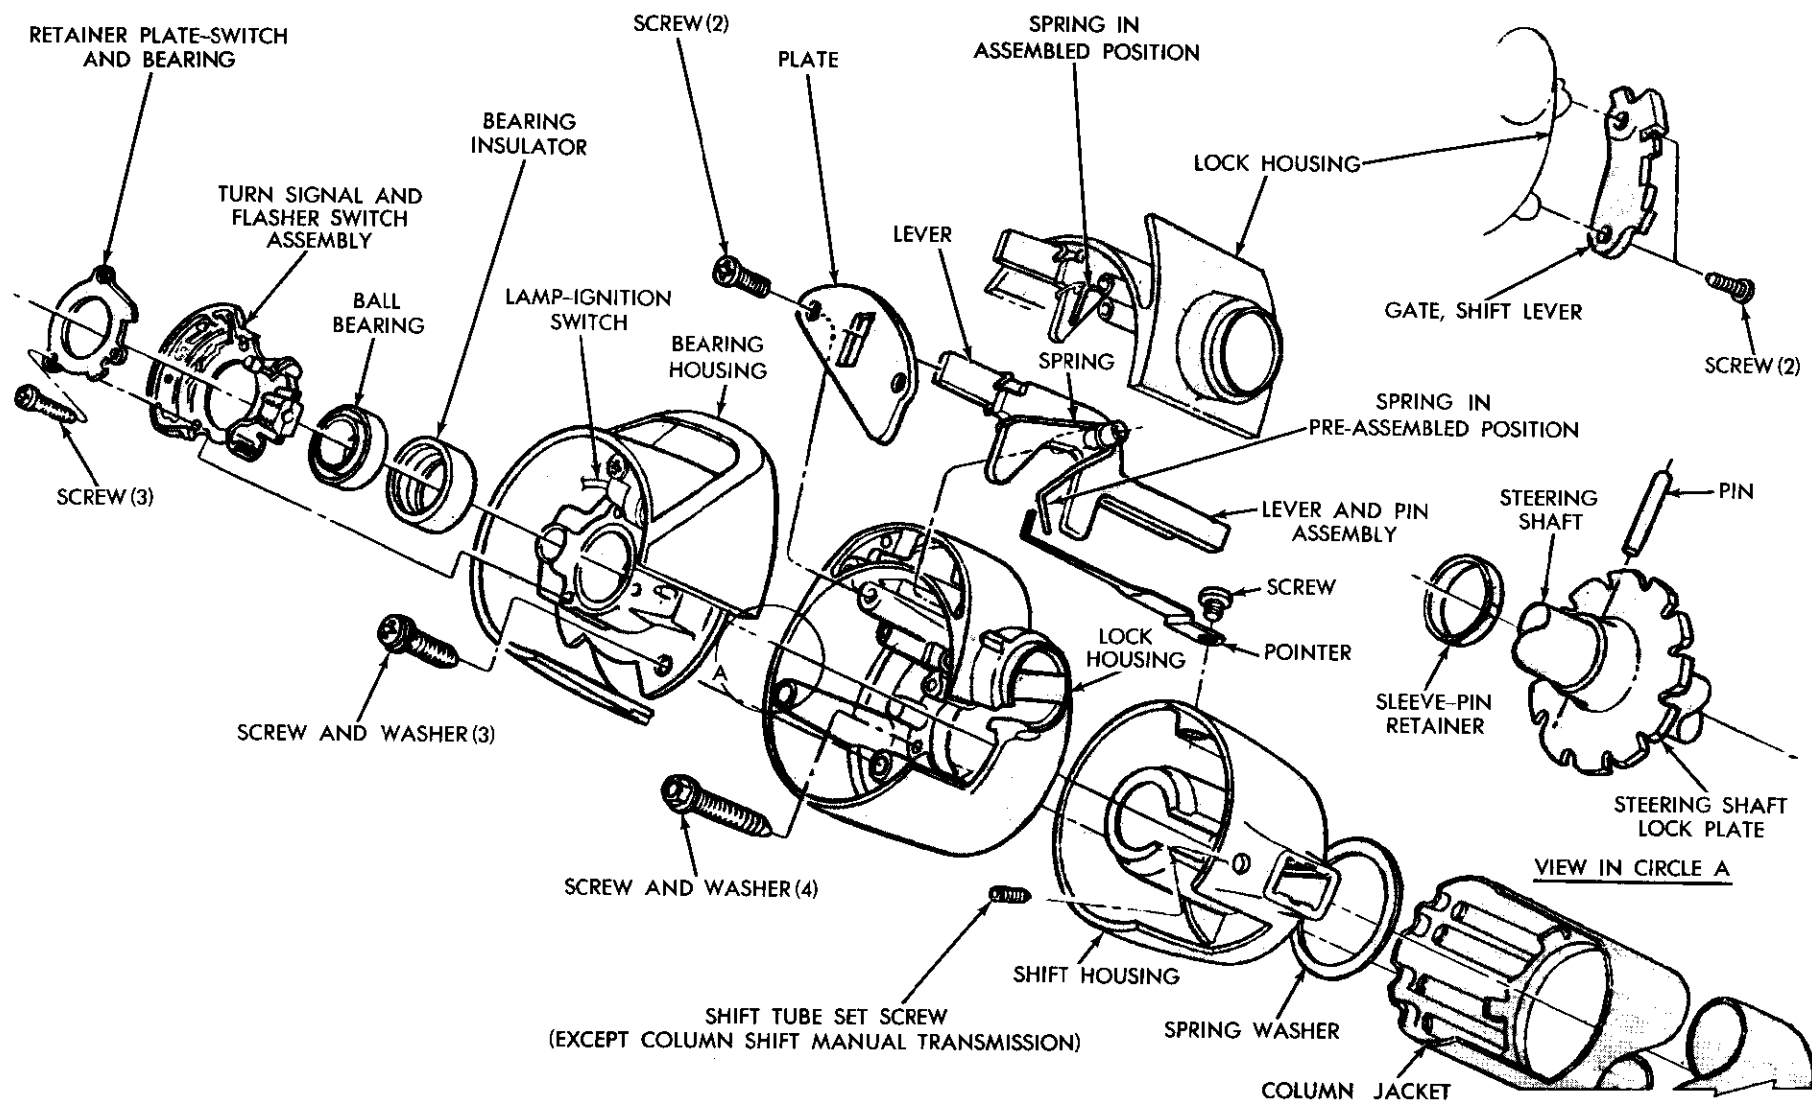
Steering Column Upper End—Disassembled (With Quadrant)
